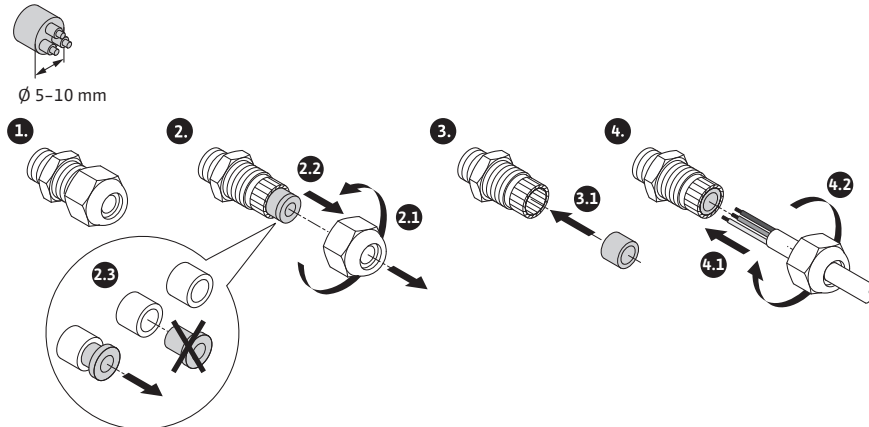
Threaded cable glands Ø 5 – 10 mm
